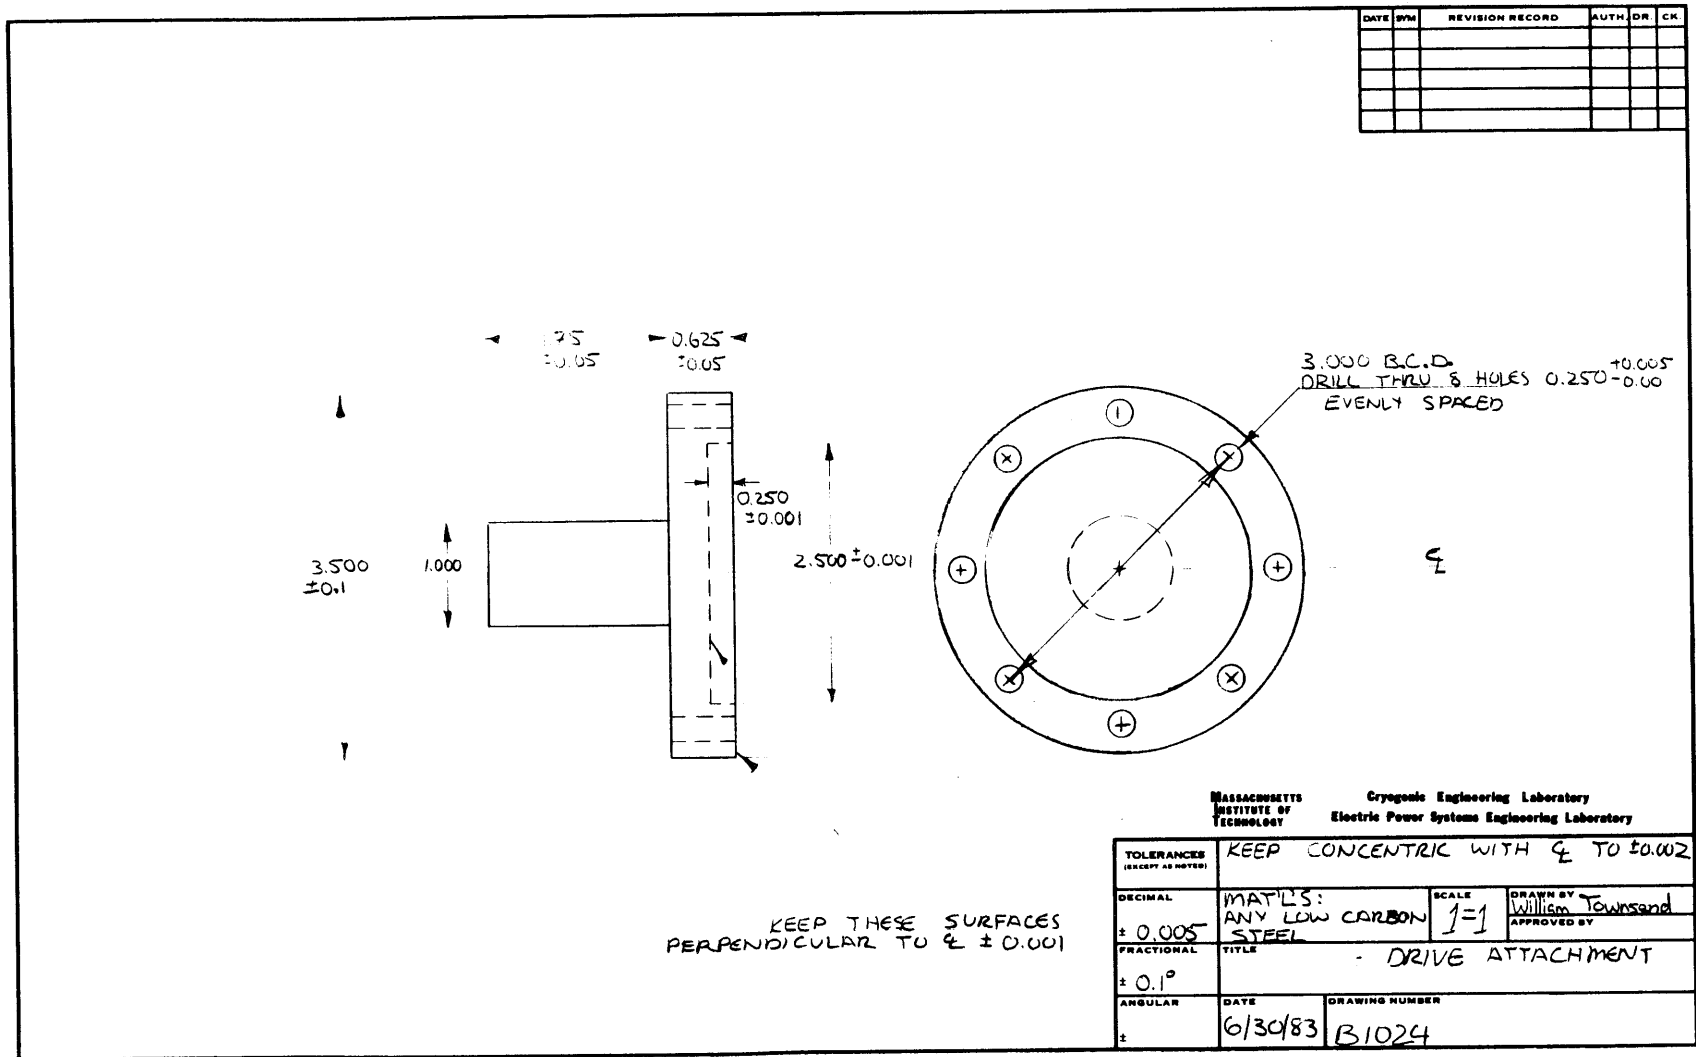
DRAWING OF MATING PIECE FOR THE INTERNALLY SPLINED HUB
